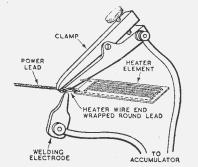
Suggestions for an improvised electric welder for joining the power leads to the leading-out wires of the heater element. The accumulator leads must be of heavy cable, as short as possible.
